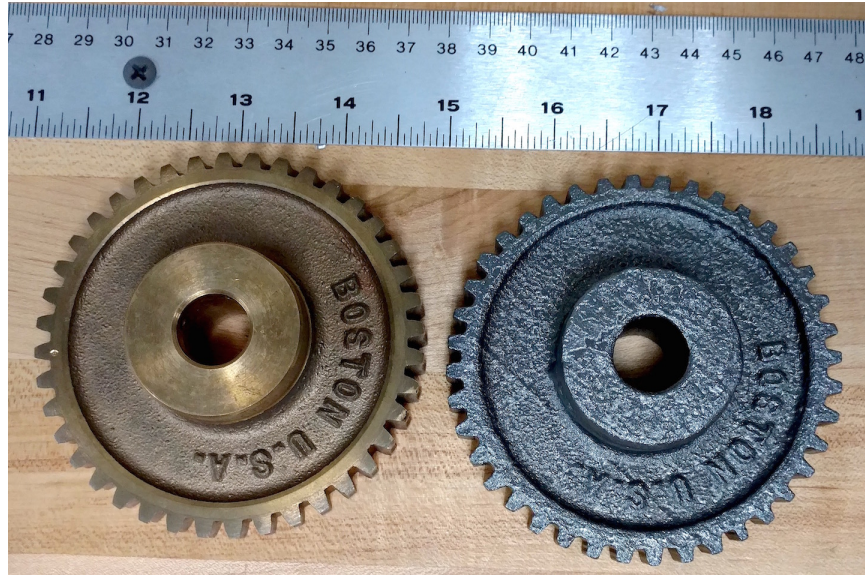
Original part (left) and Additive Manufactured Maraging Steel part (right)
